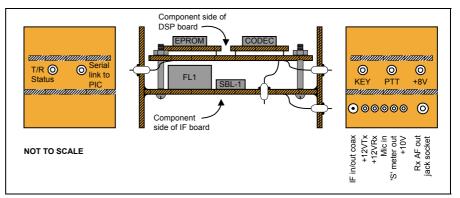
DSP assembly illustration and recognition drawing, not to scale. The IF board and two end-plates are seam soldered to form an H-section. The height of the end-plates is typically 6cm as a minimum but can be up to the full height of the Tx/Rx enclosure. The DSP board is bolted to the back of the IF board. Note that critically, the external connections are brought out at different 'levels' depending on which side of which board they connect to - and at different ends depending on the destination. Two further sides and a top and bottom (not shown) complete the screening but are not added until after final commissioning.
